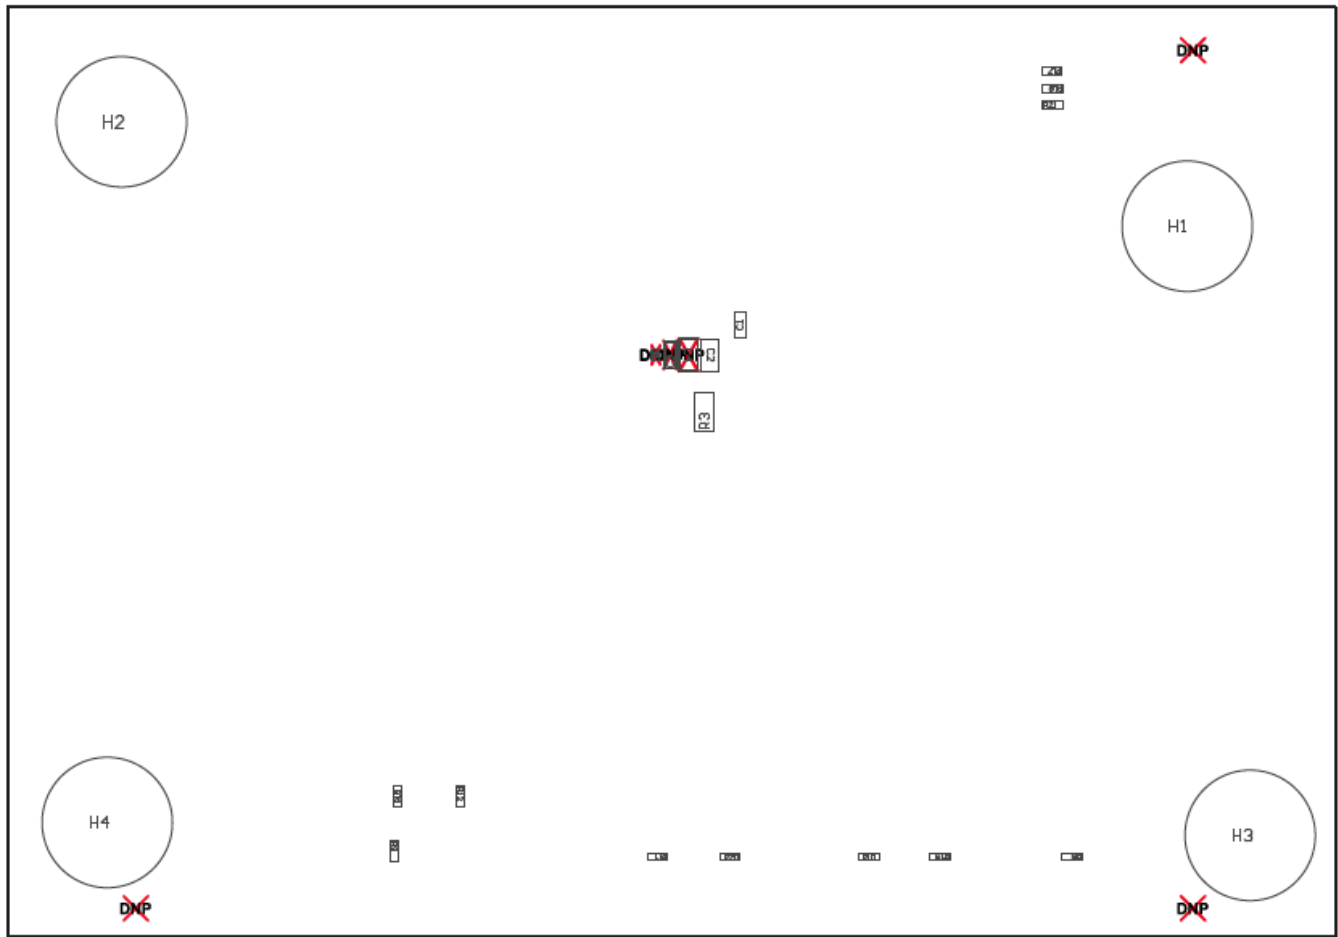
bq2587xEVM-813 Bottom Layer Assembly
